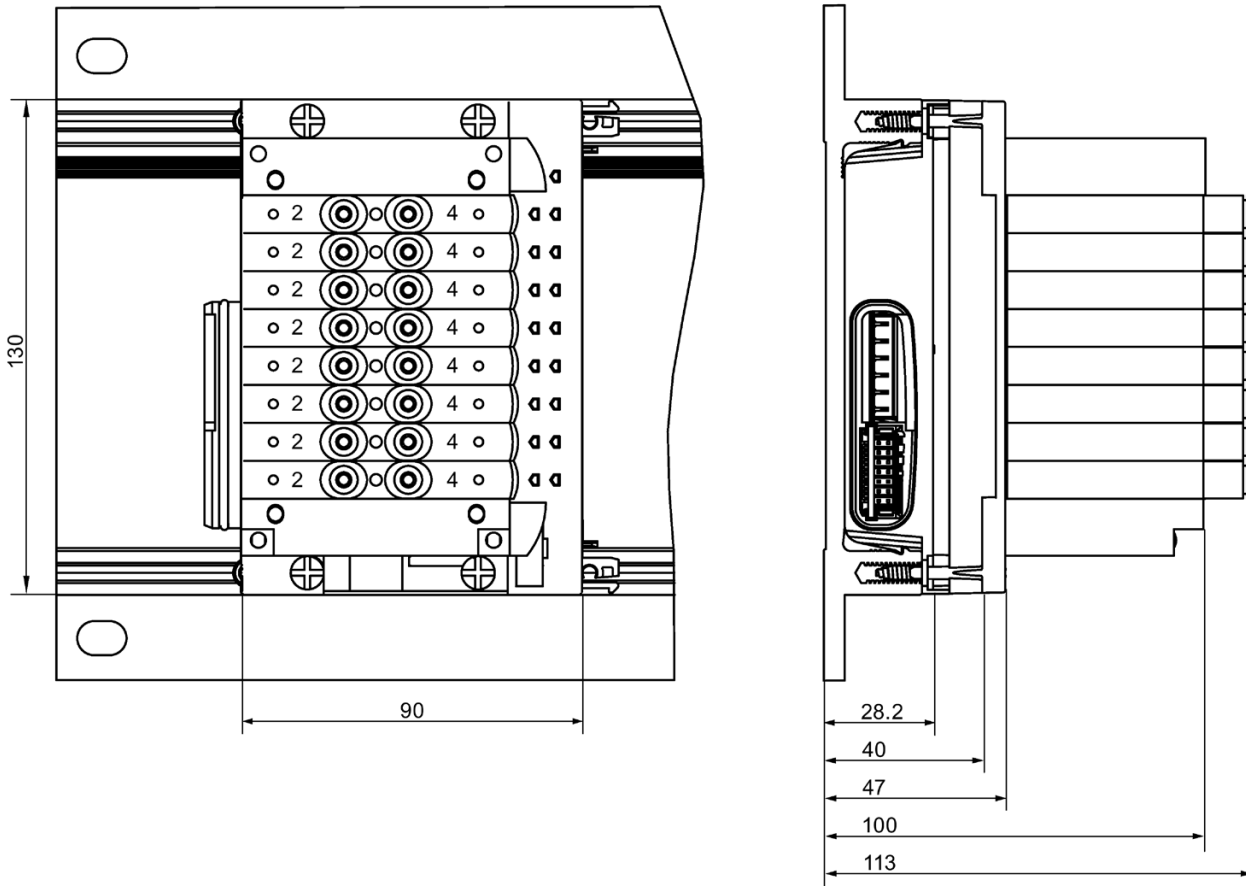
Dimension drawing of 16 DO DC 24V CPV10 pneumatic interface module with FESTO valve terminal CPV10 on compact type rack
